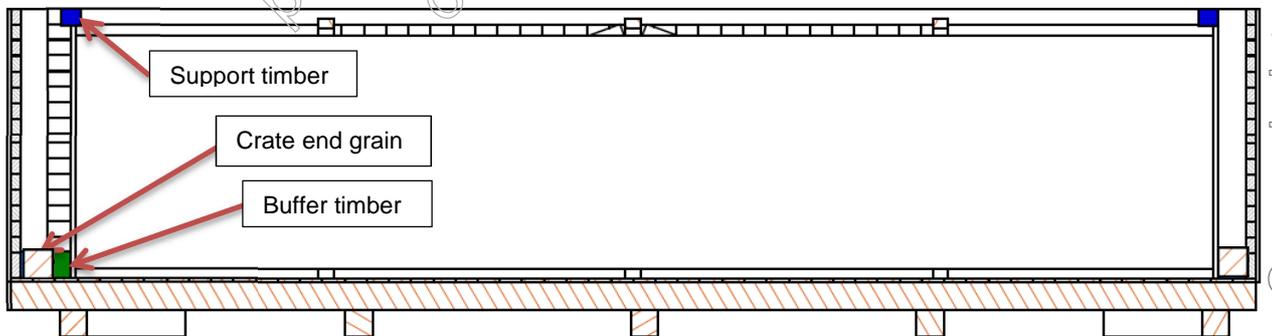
Securing the roll shell in the crate with flanged journal or dummy head
